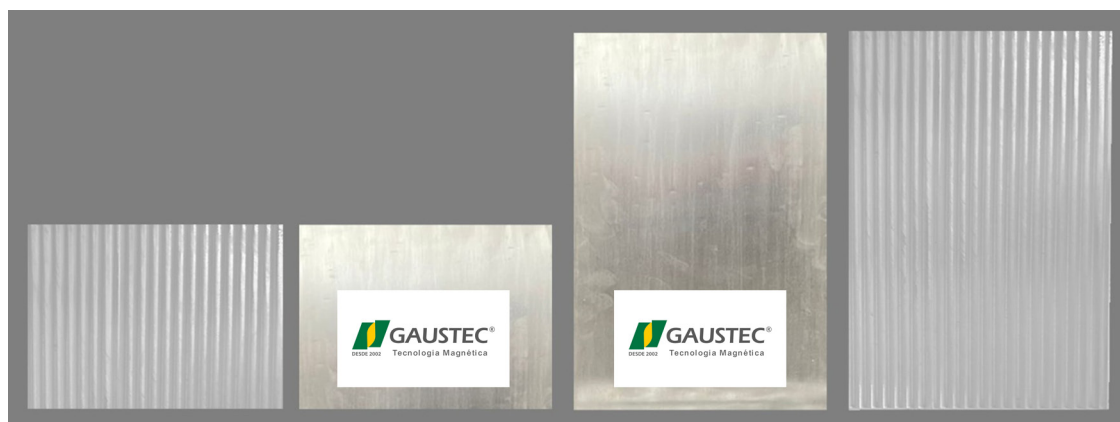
Grooved Plates 1H (220mm) and 2H (440mm).
